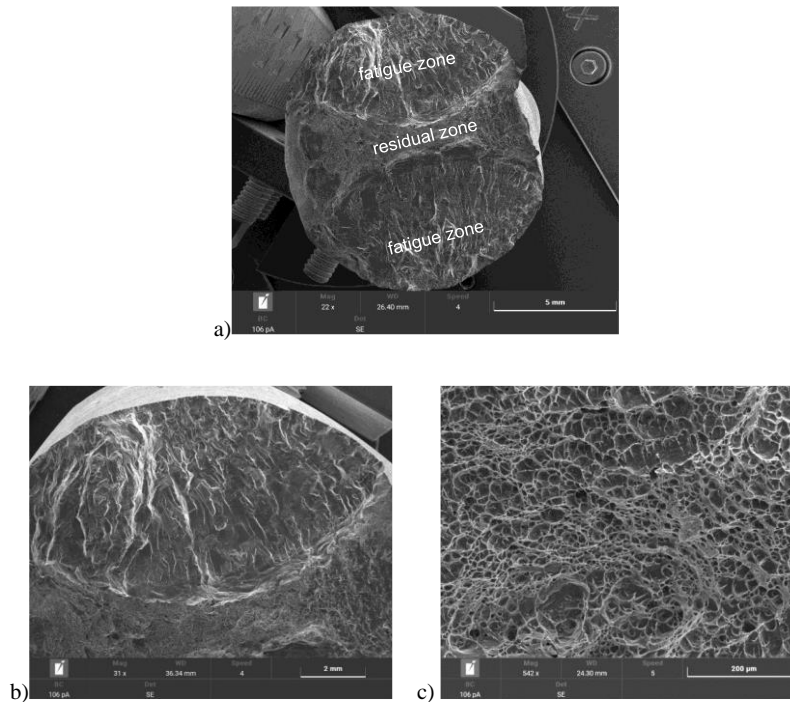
Fatigue fracture of the alloy after T64 treatment caused by bending: a) fracture morphology, b) surface in the area of the fatigue zone, c) surface in the area of the residual zone (specimen 13 - 10,270 cycles).
